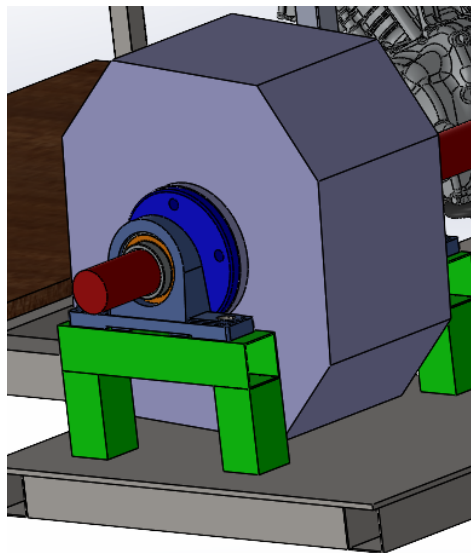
Model highlighting where this rotary shaft is to place in the assembly
